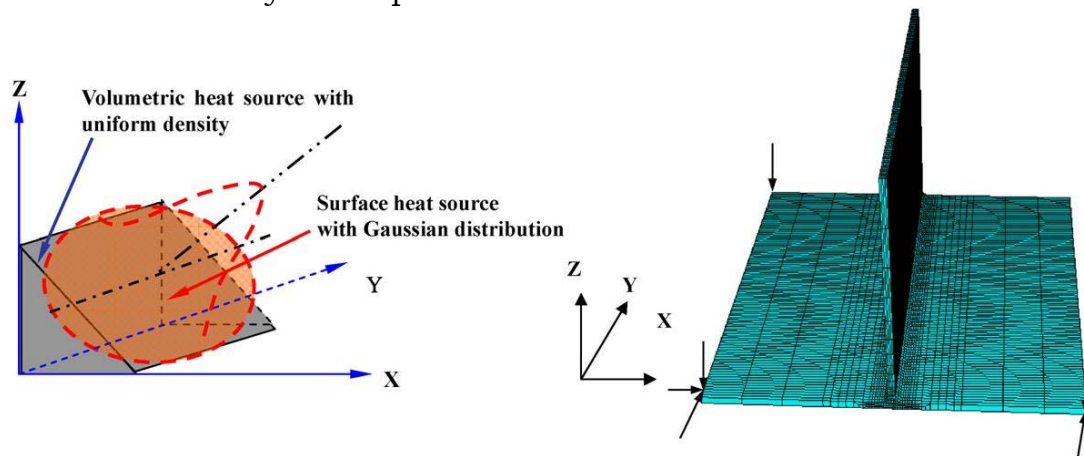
The application of a volume heat source as a body force combined with a surface load in single pass fillet weld [18]
